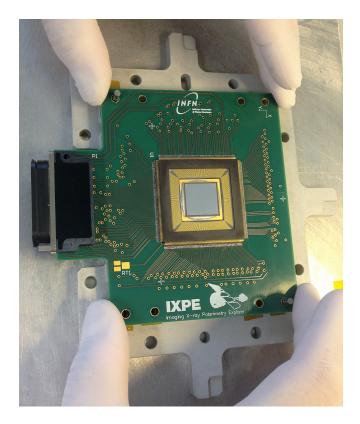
This picture shows one of the prototype of the IXPE GPD board during the detector assembly. The ASIC at the center of the board is clearly visible. The PCB contains also the passive components that need to be close to the chip. Other components like the ADC and the control system are placed in a separate board.
